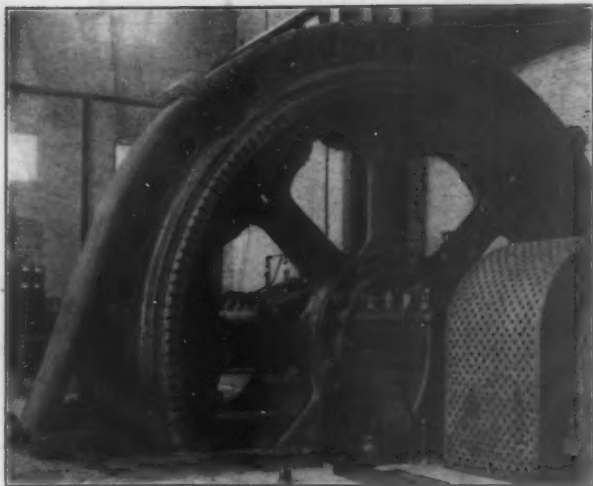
The General Electric 6,000 H.P. Main Drive Motor for the Sheet-Bar Mill.
